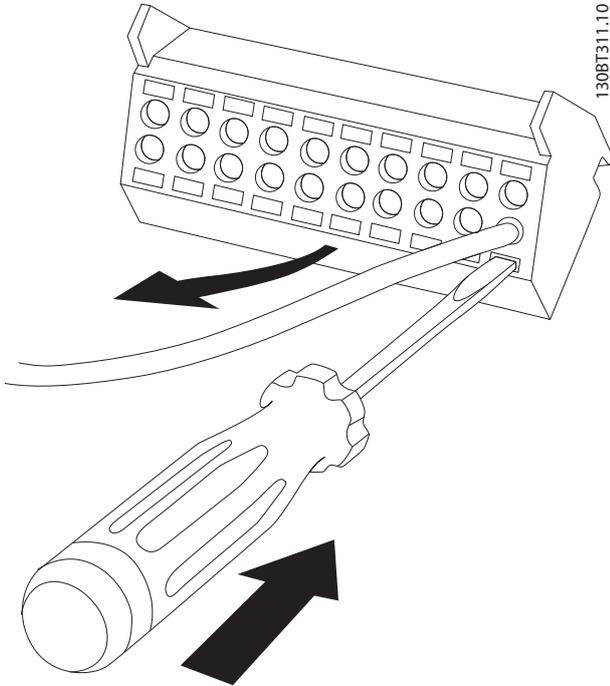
Removing the Screwdriver after Cable Insertion
